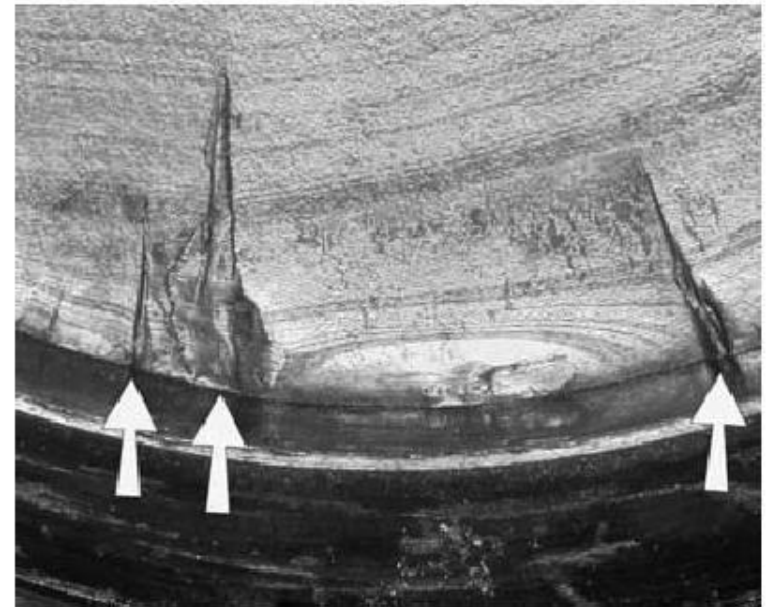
Close-up view of ratchet marks between distinct surface origin sites in a low-alloy steel 18.4 cm (7.25 in.) shaft that failed in rotating bending fatigue. Ratchet marks (at arrows) are roughly radial steps formed where fatigue cracks initially propagating on different planes intersected. The ratchet mark at the middle arrow was damaged by postfracture contact.
